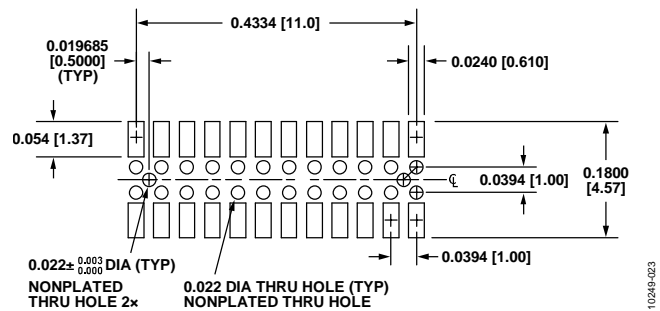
Suggested Layout and Mechanical Design for the Mating Connector
